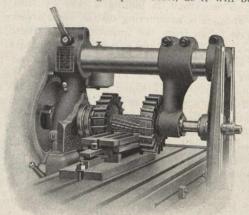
Rough Milling the bottom and sides of a Vise Bed.
